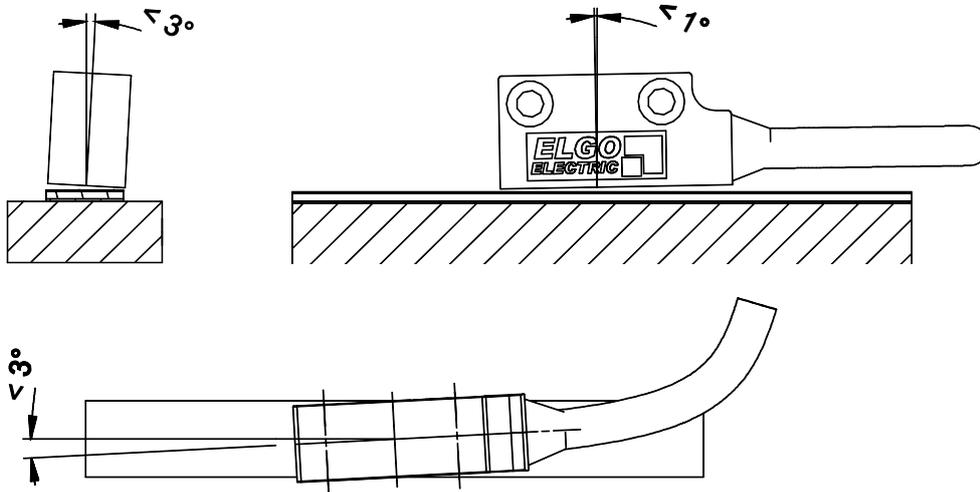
Angular tolerances of the Magnet Sensor
